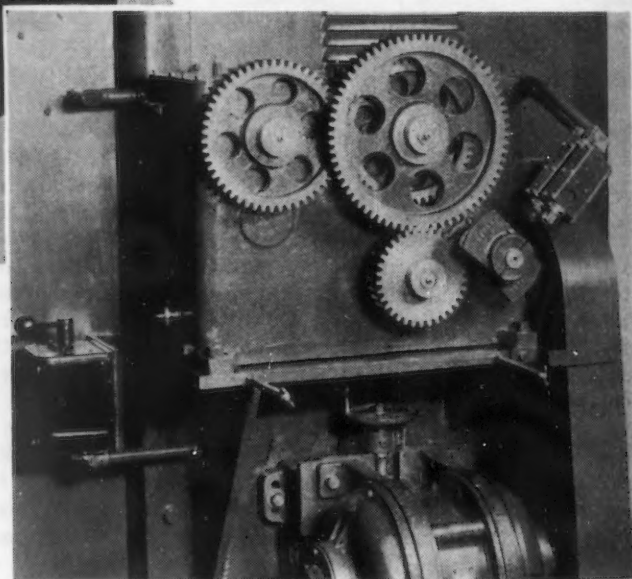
The condenser discharge principle has been applied to a continuous or intermittent spot welder for fabricating aircraft subassemblies. The first Federal Uni-Pulse machines have just been put into operation. Inset shows alternate design in which both the upper and lower rolls are power driven.
